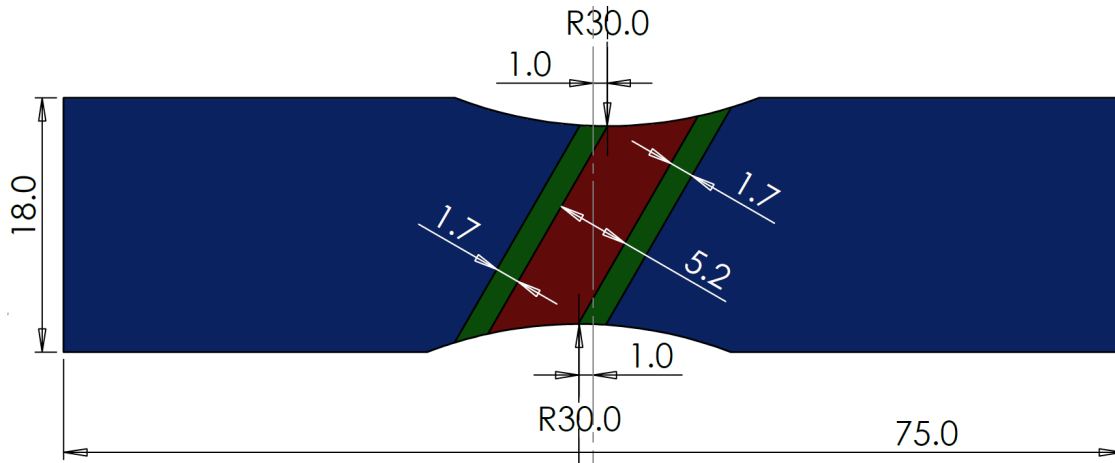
Notched, off-axis butt-weld geometry. Dimensions in mm.
